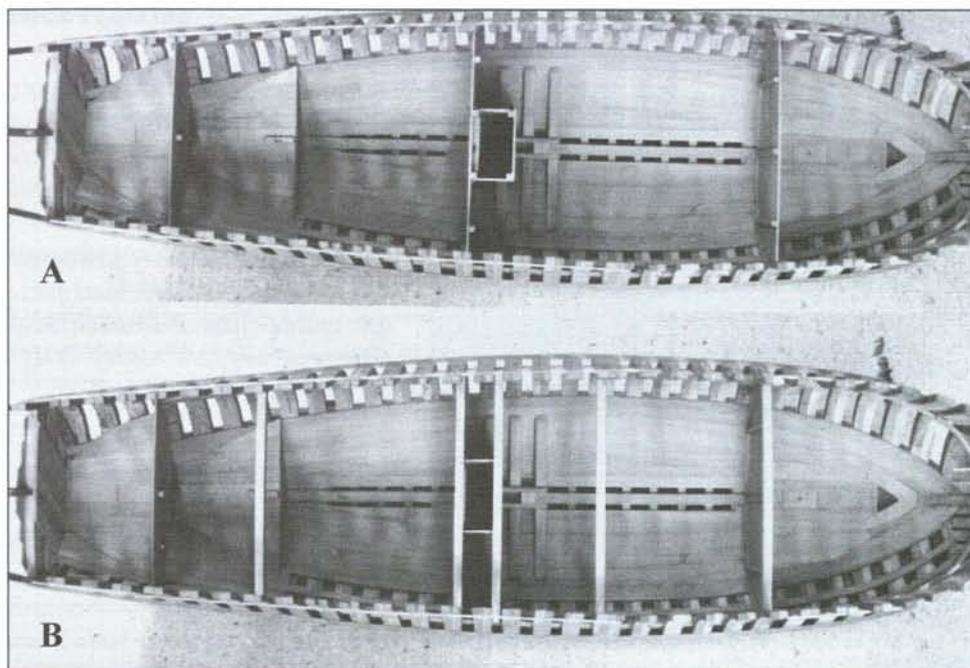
A. Internal structures before the installation of deck beams. B. Installation of deck beams required by internal structure.
